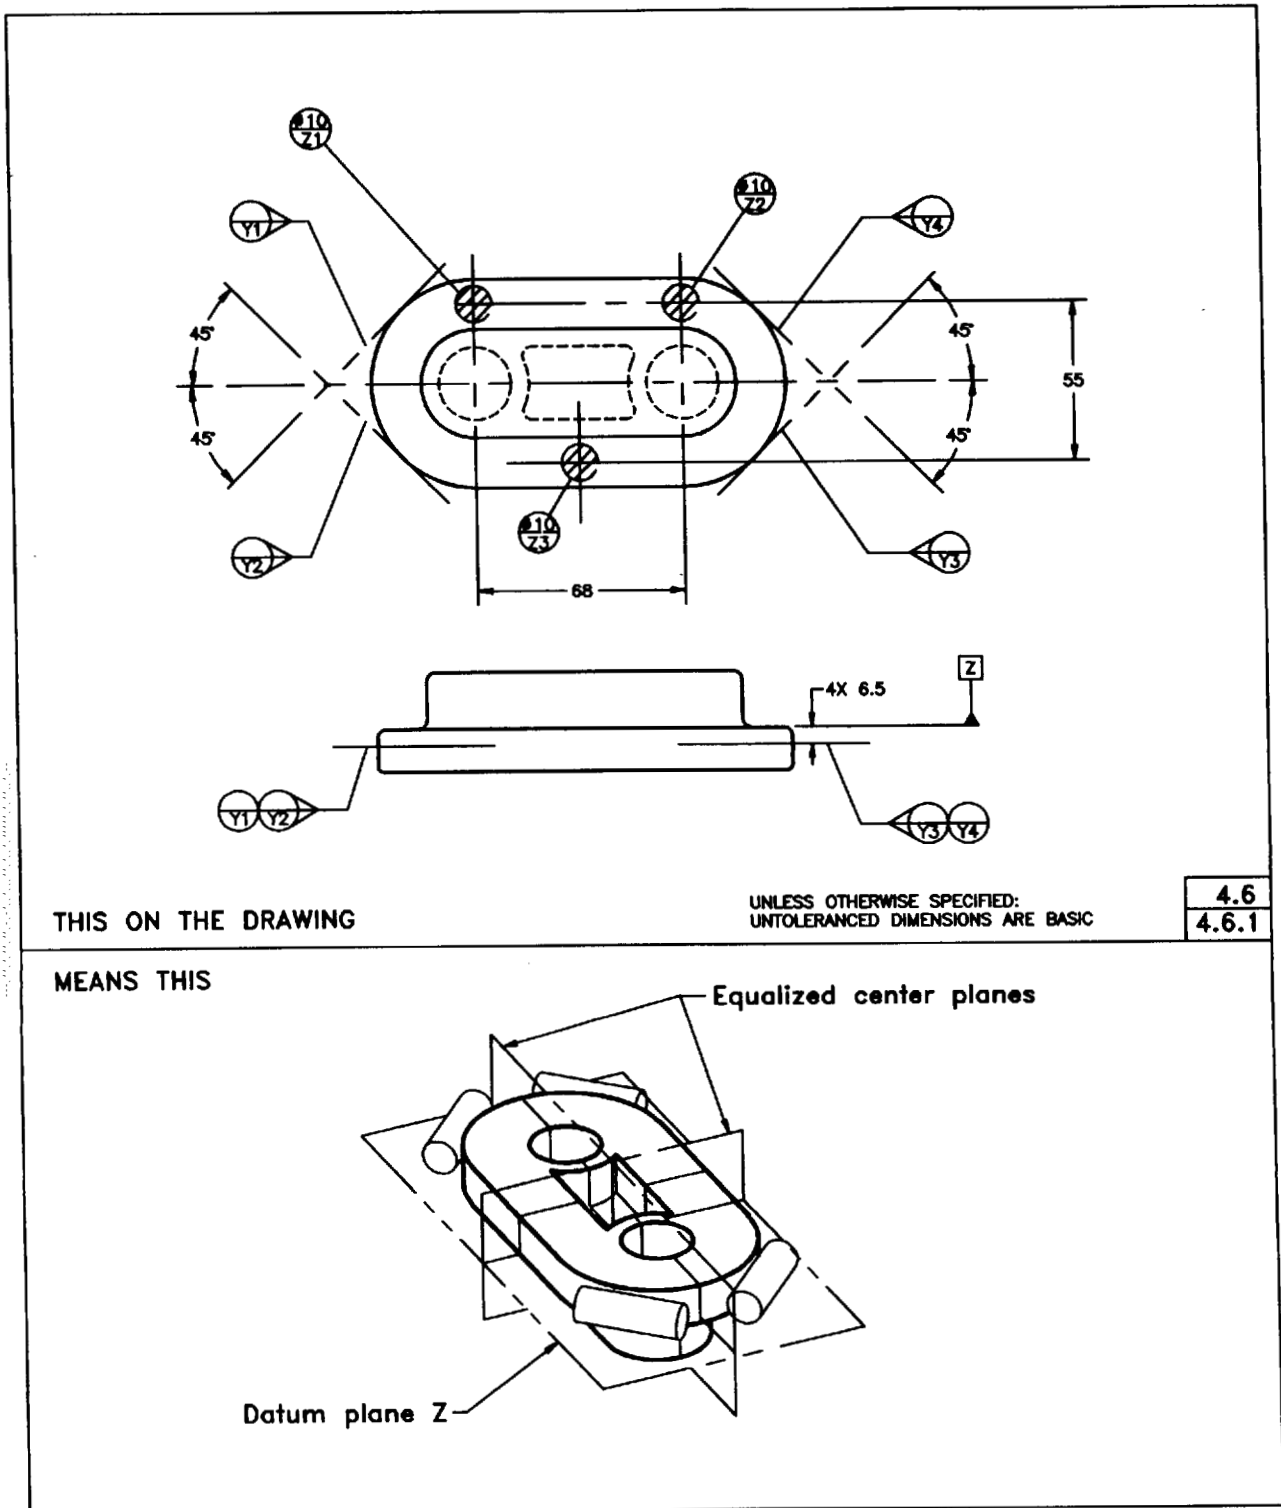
MOVABLE DATUM TARGETS ESTABLISHING TWO DATUM CENTER PLANES
